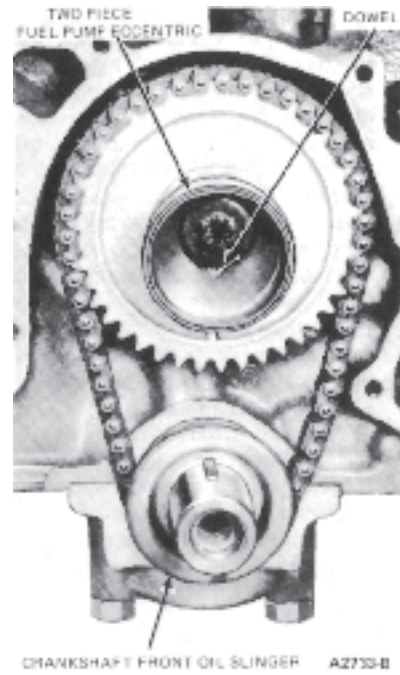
Fuel Pump Eccentric and Front Oil Slinger Installed
